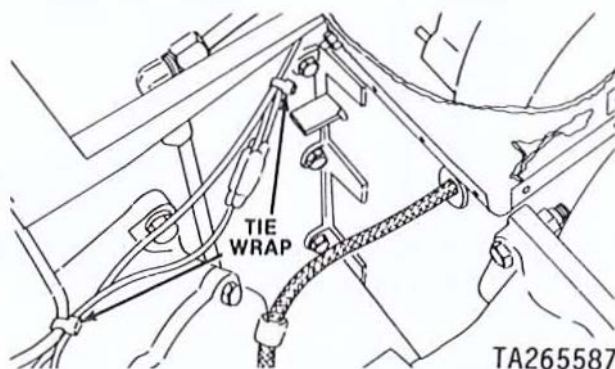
Removing or Installing Smoke and Dust Detector Electrical Cables
